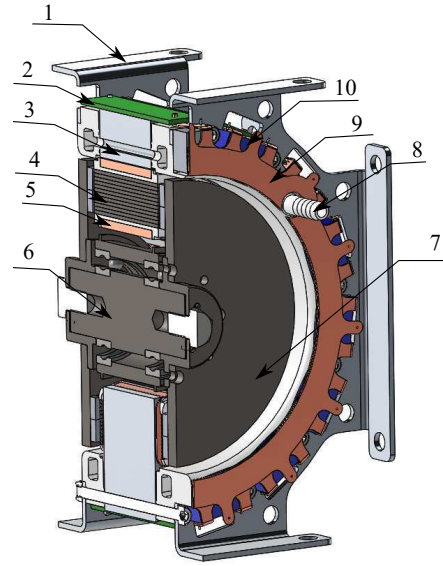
A CP integrated drive: (1) Mounting structure, (2) Converter module PCB, (3) Cooling channel, (4) Core, (5) Winding, (6) Shaft, (7) Rotor disc, (8) Cooling fluid fitting, (9) DC-link bus-bar, (10) DC-link capacitor
